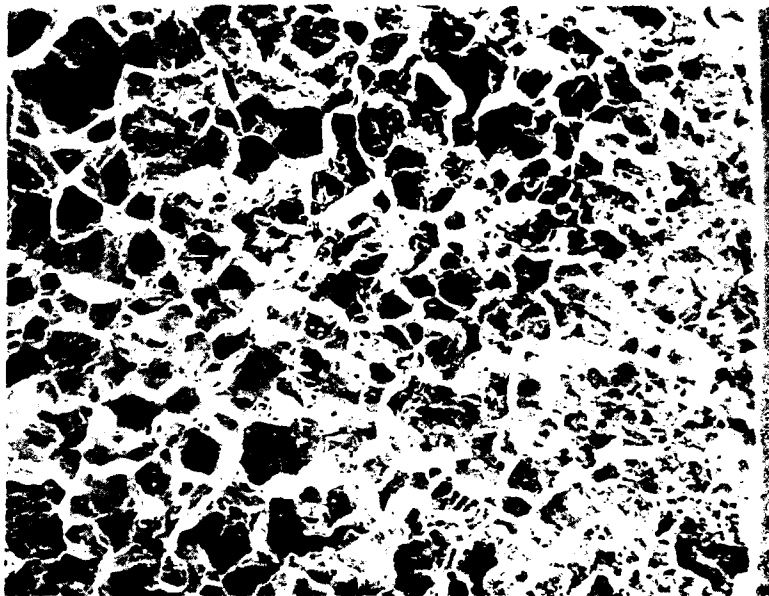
A higher magnification of the case area from Fig. 11, showing a mixture of intergranular and transgranular fracture. Transgranular fracture is more prominent near the pin surface. This is similar to what one would expect with corrosion fatigue. (500X).
